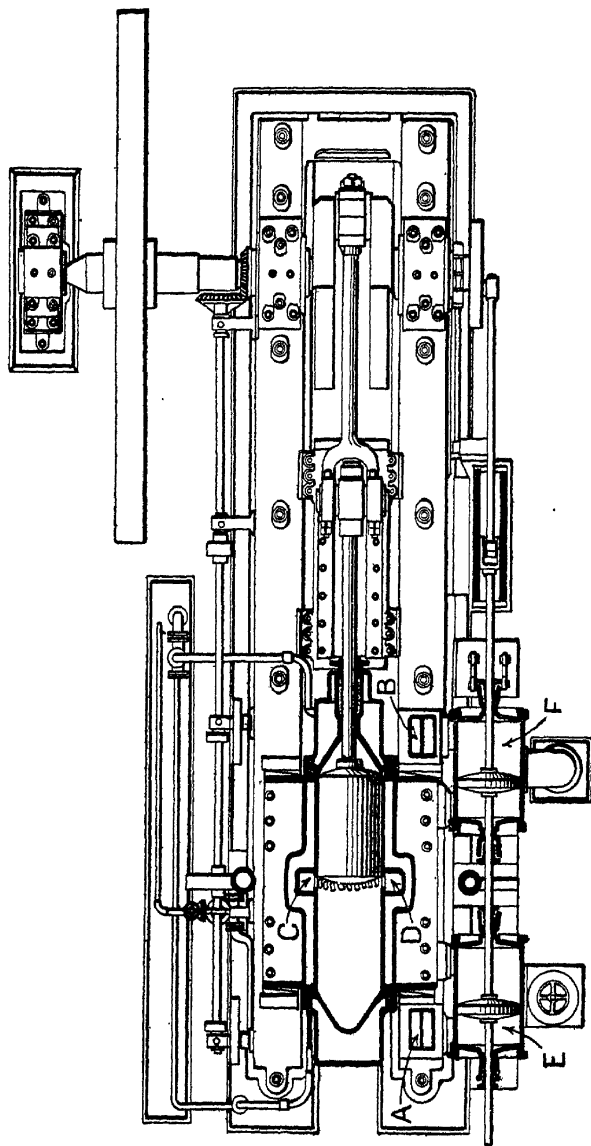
KOERTING ENGINE, Sectional Plan.
